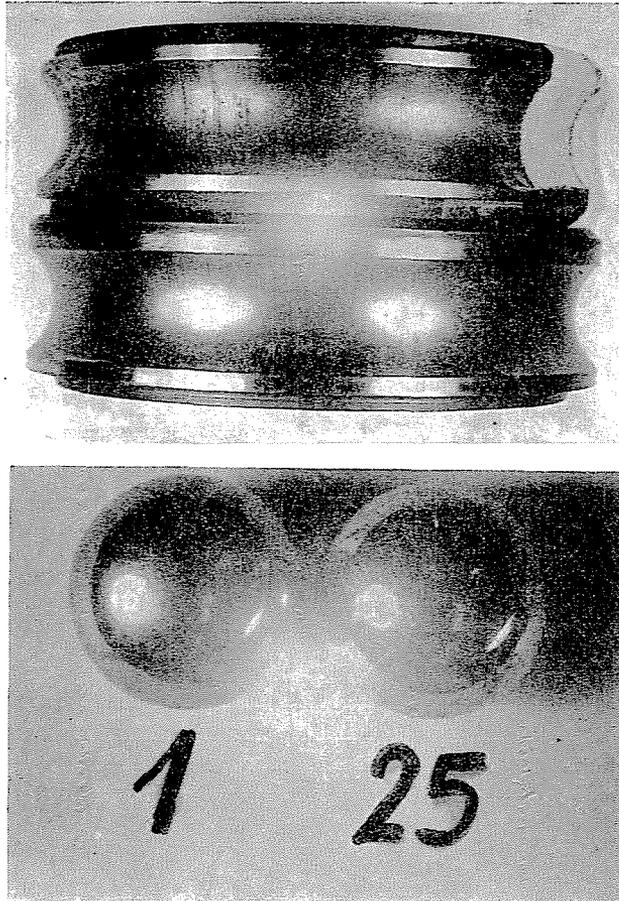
Surfaces of the inner ring and of the roller element of used bearings
